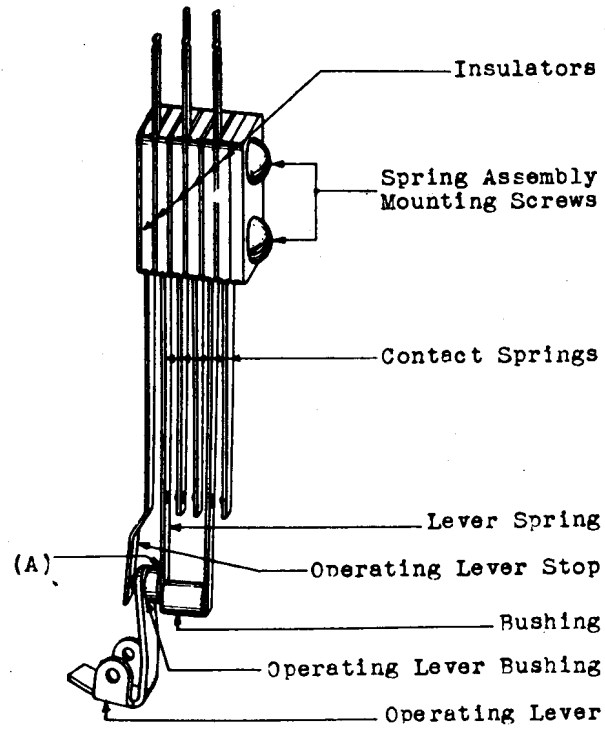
Spring Assembly - Internally Adjusted Dashpot Relay
